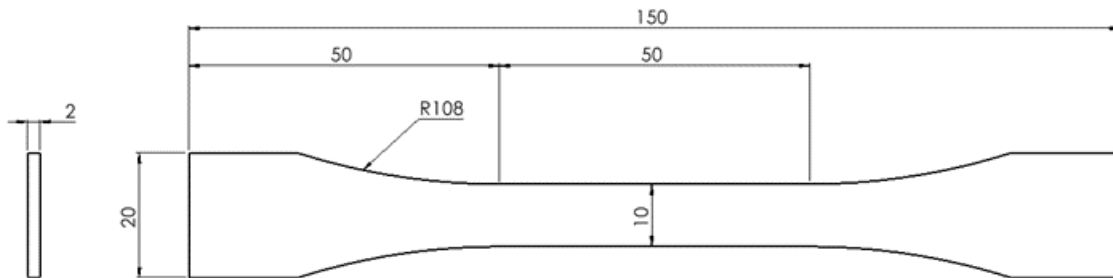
BS 2782 standard tensile specimen geometry (dimensions in mm).
